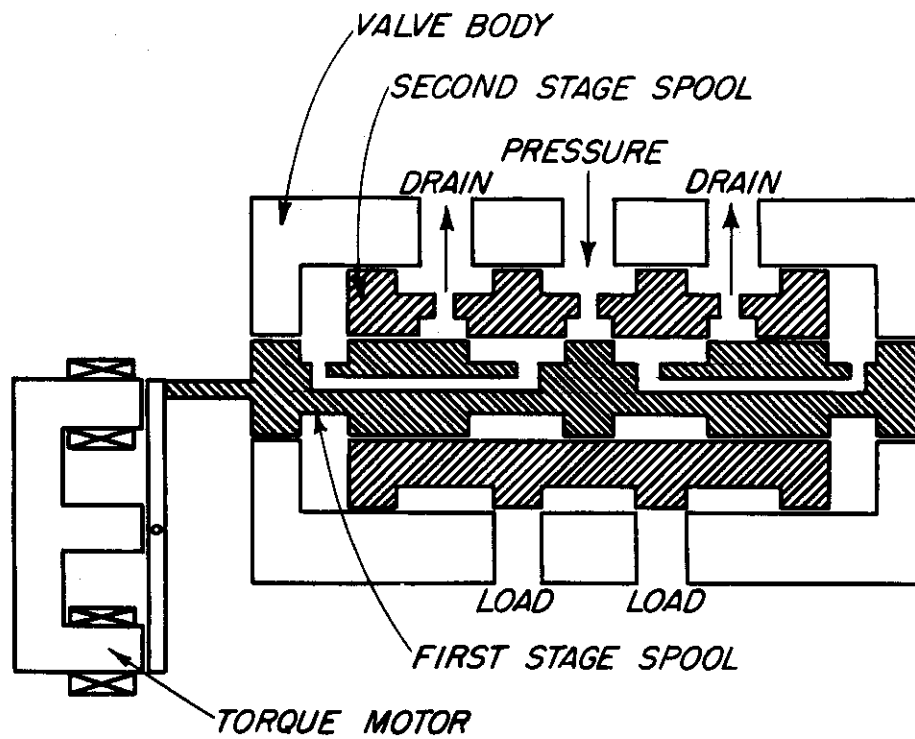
Schematic of Cadillac Gage CG-II Valve
